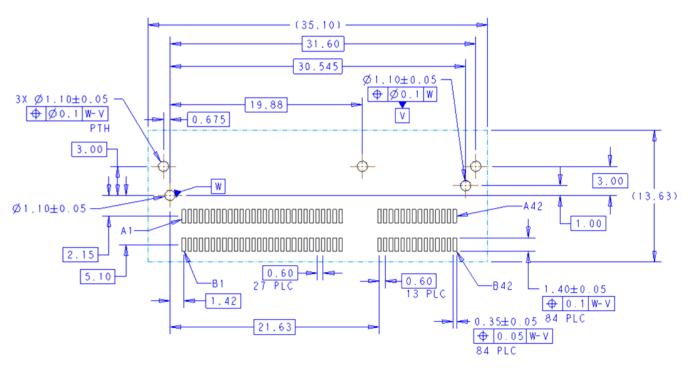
2C RIGHT ANGLE CONNECTOR FOOTPRINT
